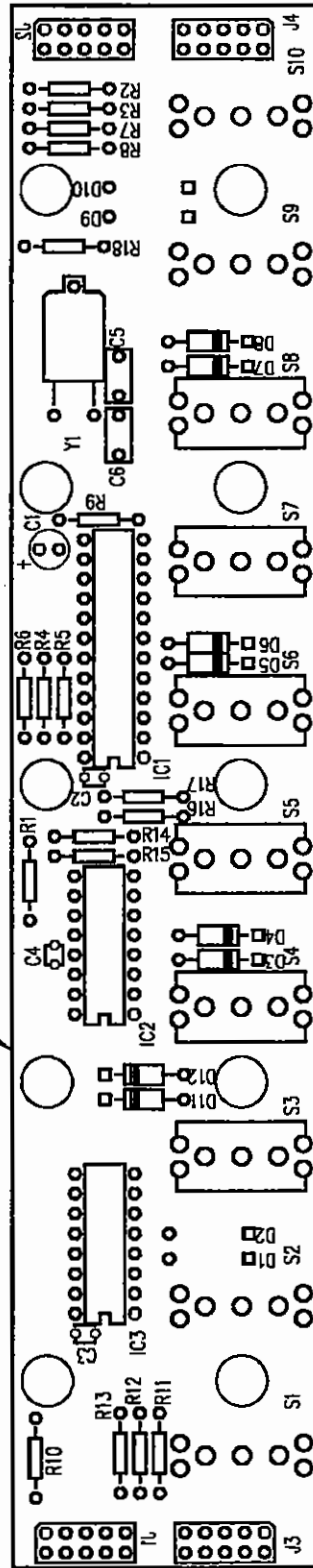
Assembly drawing - ICS-52 Selector Switch PCB Rev. A
